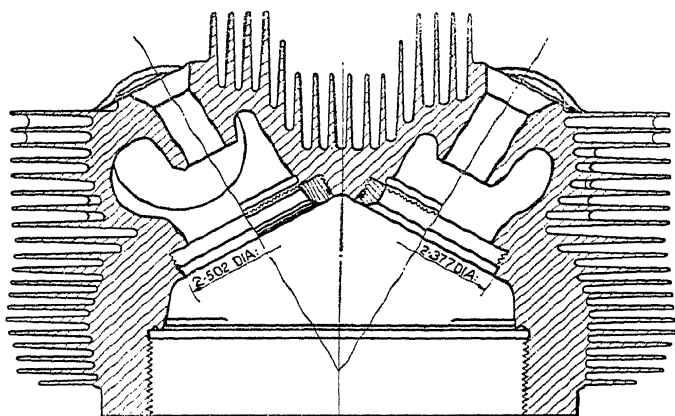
Sectional view of Bristol aluminium alloy cylinder head.
